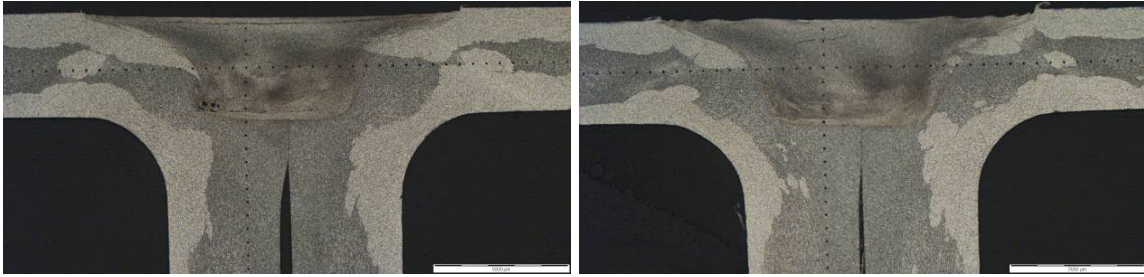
Barker's etched macrographs of the weld area in the displacement control weld (left) and the force control weld (right).
